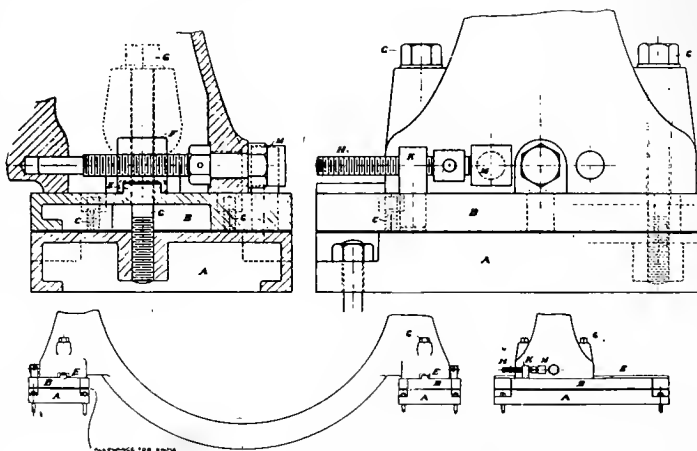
ADJUSTABLE SOLE PLATE OF ALTERNATOR.
